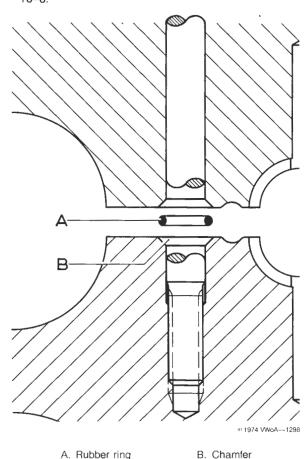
O-ring installation. As the crankcase halves are joined, the silicone rubber O-rings will be compressed into the chamfers around the studs.
